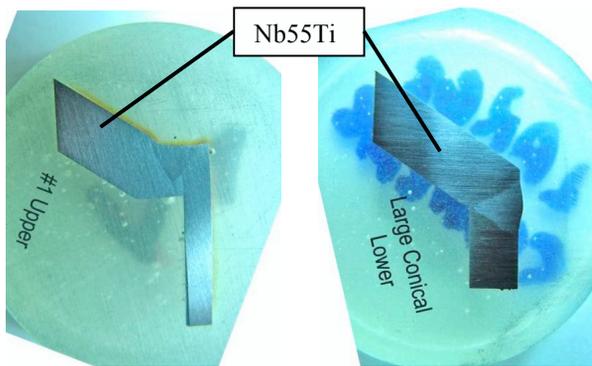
EB weld samples of helium vessel Ti shell to large conical disk (right), and Ti spacer ring to small conical disk (left).
